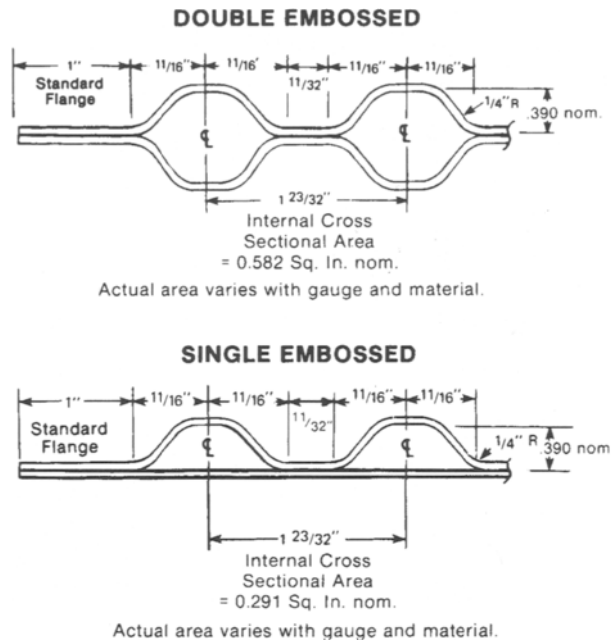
B. Platecoil® double- and single-embossing designs for standard units. The Platecoil® is fabricated using resistance, spot, seam, and Tungsten Inert Gas (TIG) and/or Metal Inert Gas (MIG) welding techniques in order to hold and seal the two plates together. (Used by permission: Cat. 5-63, ©1994. Tranter®, Inc.)
